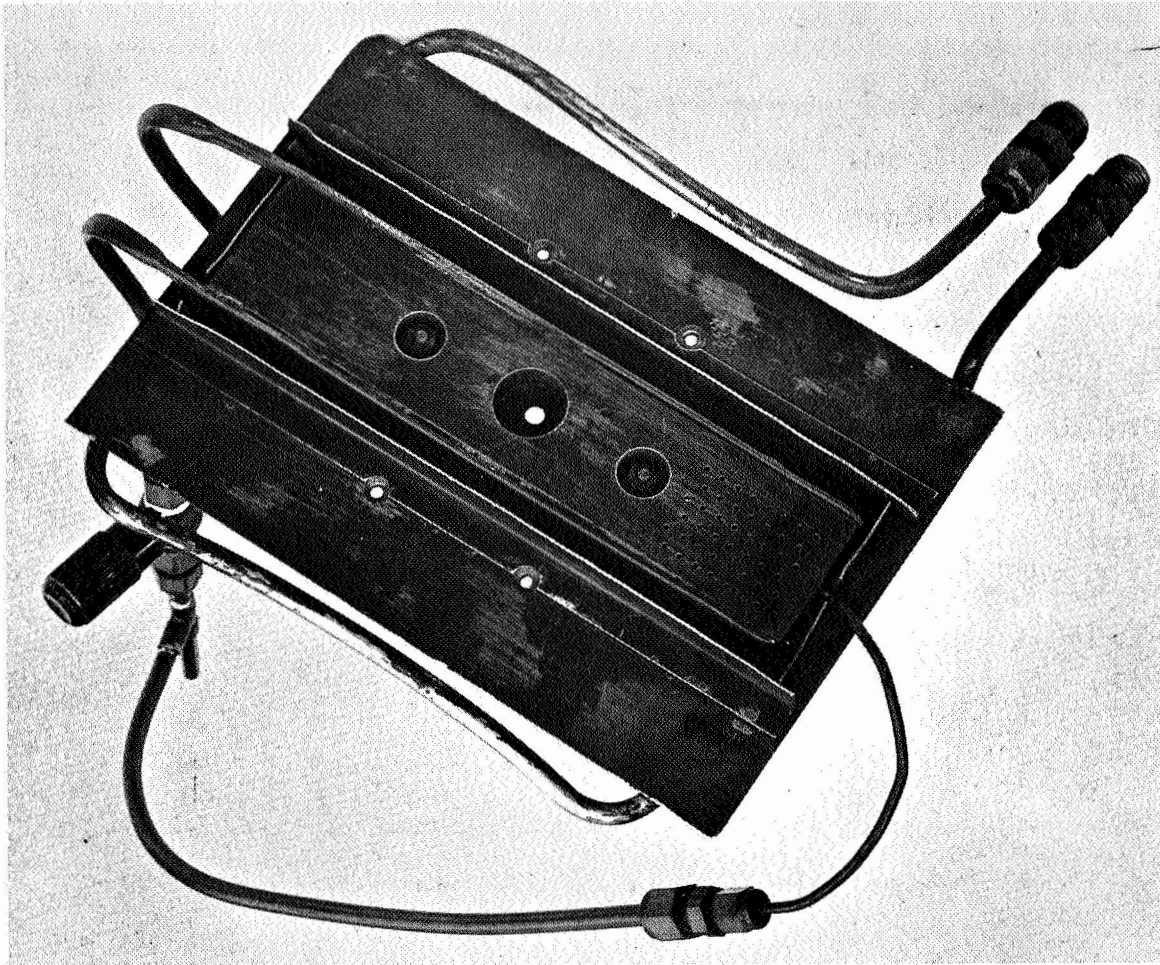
Gas Shield Device for Out-of-Vacuum Electron Beam Welding
